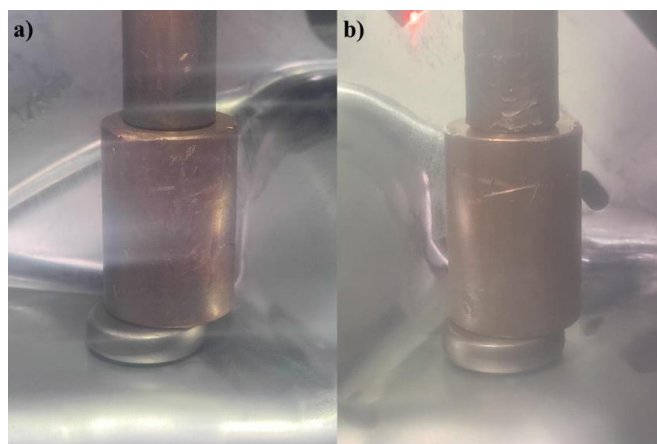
Electrode misalignment in the pedestal welding machine.
